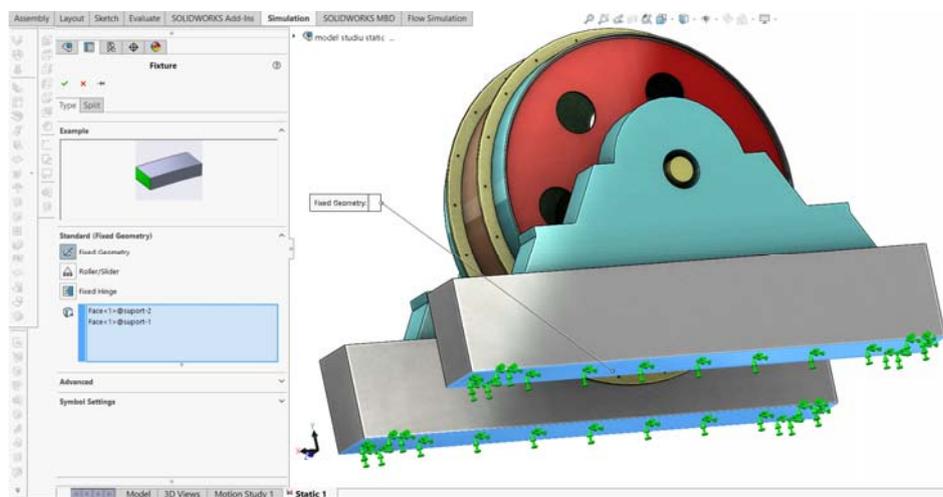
Setting the bottom surfaces of the drum supports as Fixed Geometry
